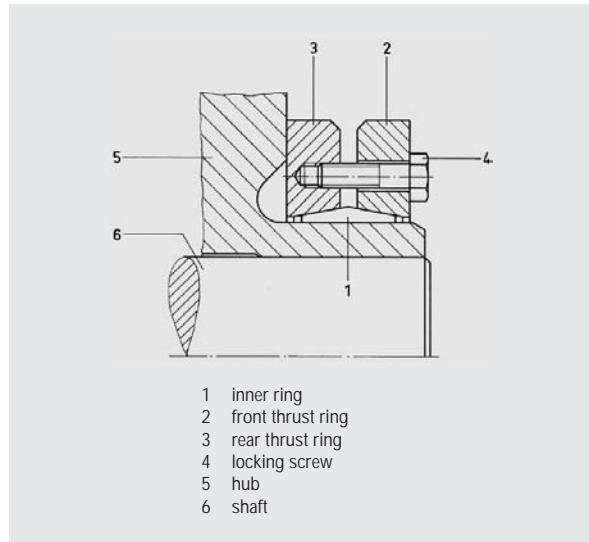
· RINGFEDER® Shrink Disc RfN 4071 /4091/4051/4073
